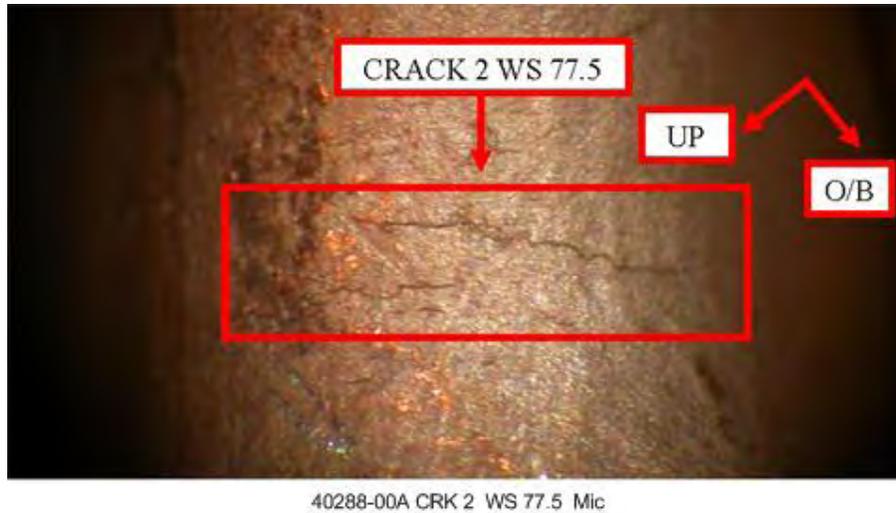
Microscopic View of Crack 2 on the Right Wing Trunnion Landing Gear Aft WS 77.5
